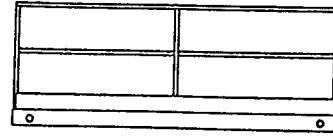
PLATFORM AND HANDRAIL INSTALLATION.
